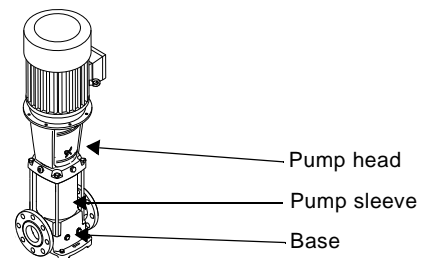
Hot surfaces on a CR, CRI, CRN pump
